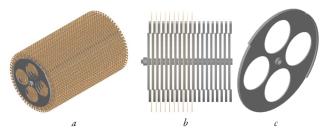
Model of a device for simultaneous processing of parts with positioning without rigid fixation of parts: a – on the fixture (isometric view); b – on the fixture (front view); c – design of the guide separator of the fixture
